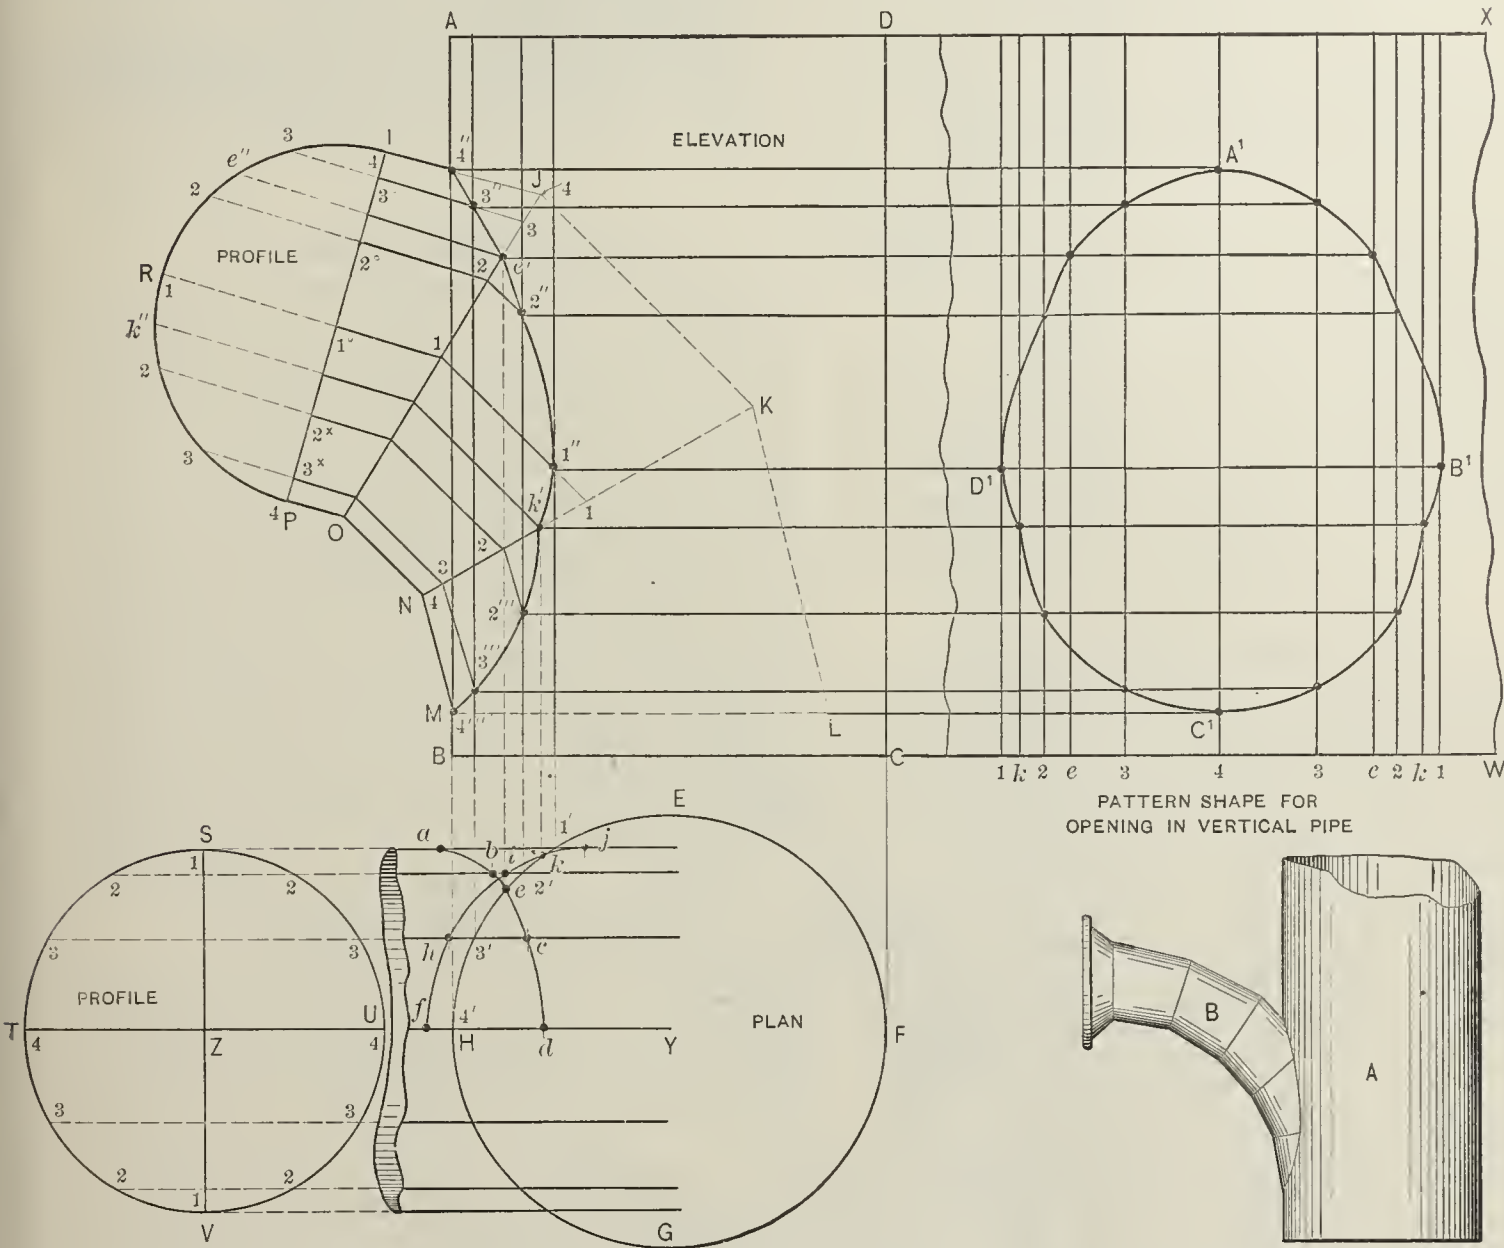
Plan, Elevation, Profiles and Shape of Opening in Vertical Pipe.
